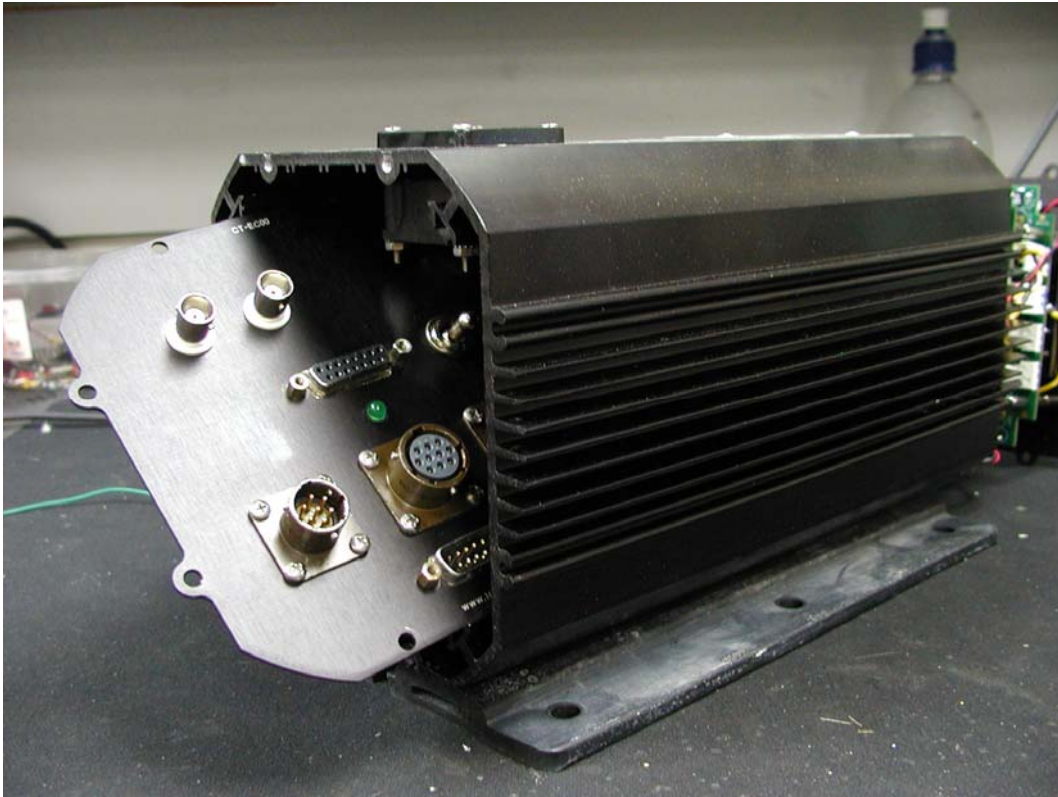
FRONT VIEW OF MMS-4 HOUSING WITH END PLATES REMOVED AND FRONT PANEL ORIENTED FOR REMOVAL THROUGH THE INSTRUMENT HOUSING
